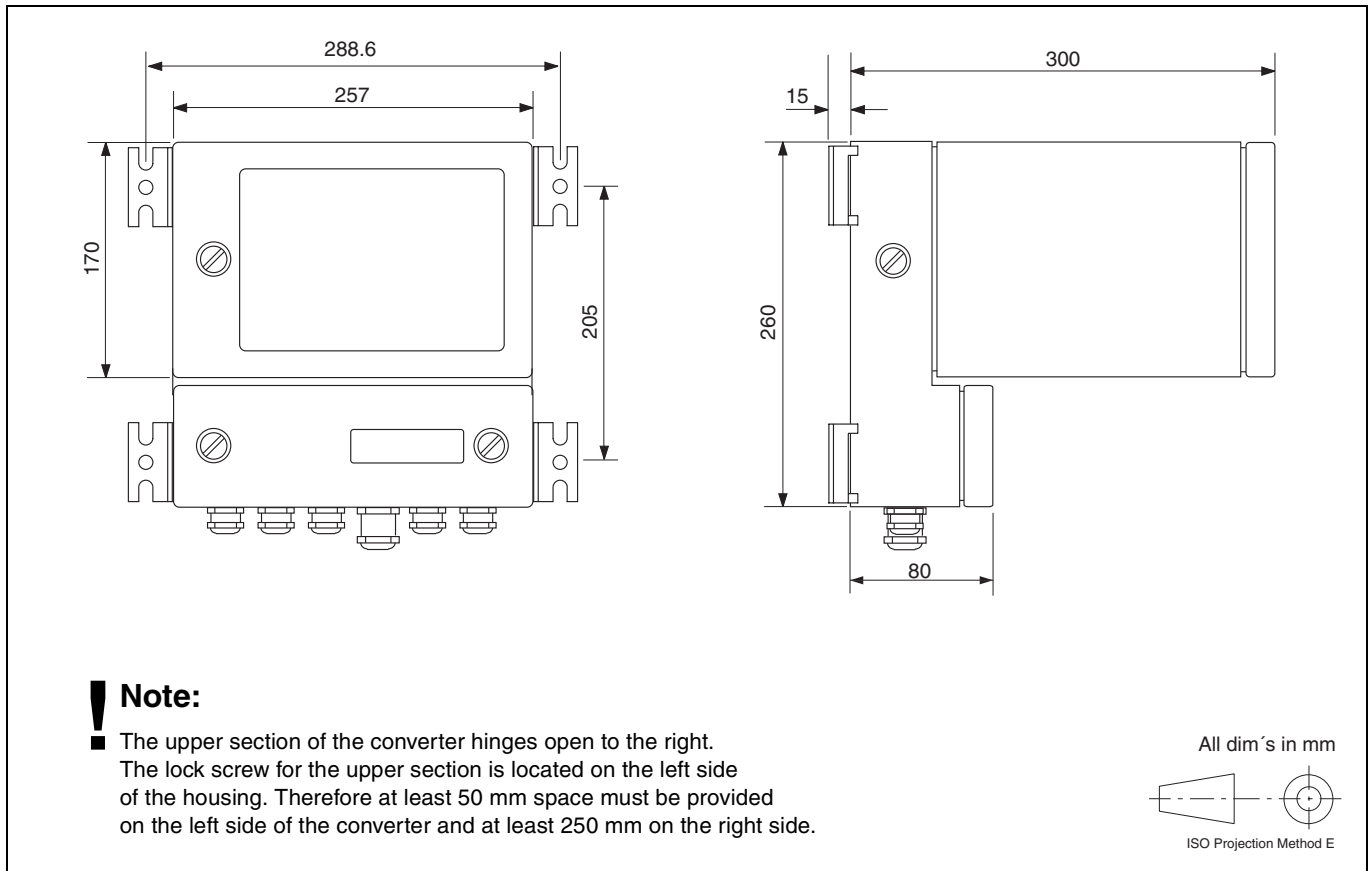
Dimensions, Field Mount Housing PARTI-MAG II
